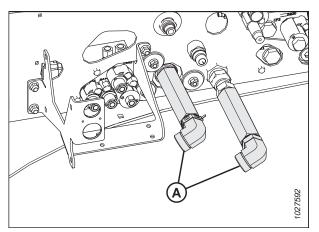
Hard Plumbed Connections – Rotary Disc Ready Windrower
